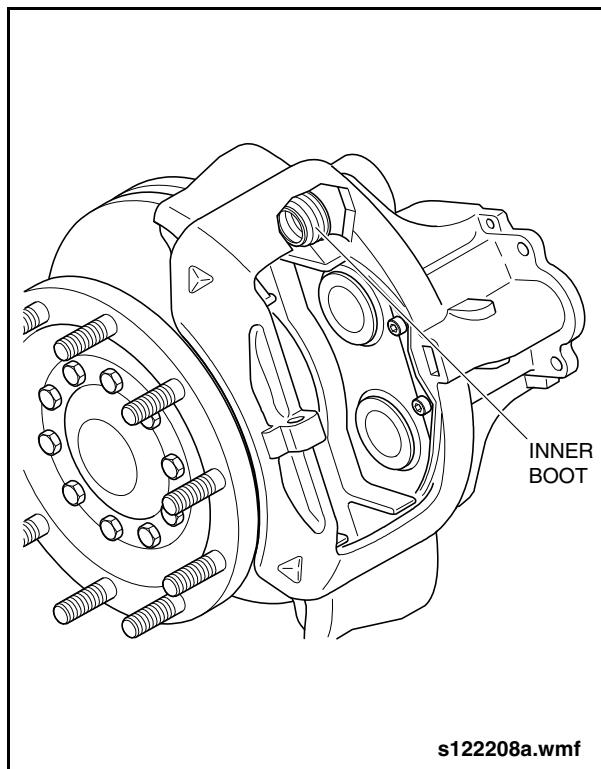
Upper Guide Pin Inner Boot Inspection
